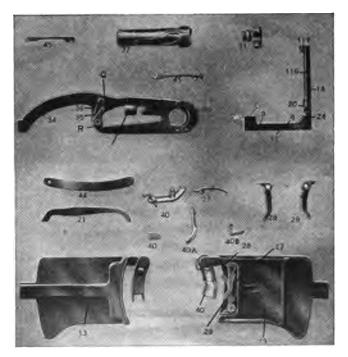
FEED MECHANISM, BOLT, EXTRACTORS, AND EJECTOR
